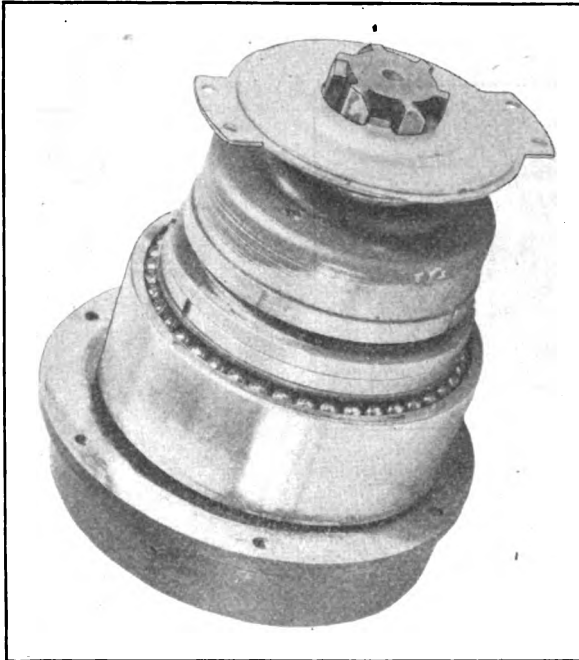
Bijur (rear end) starter driving barrel assembly mounted in roller bearing. Also friction discs.
